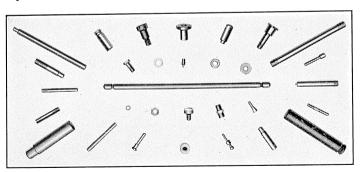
Small parts which can be made on a production basis on an Atlas Lathe equipped with turret attachments.
